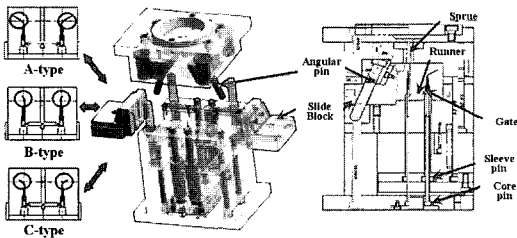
Detail scaler tip mold of 2D/3D drawing
